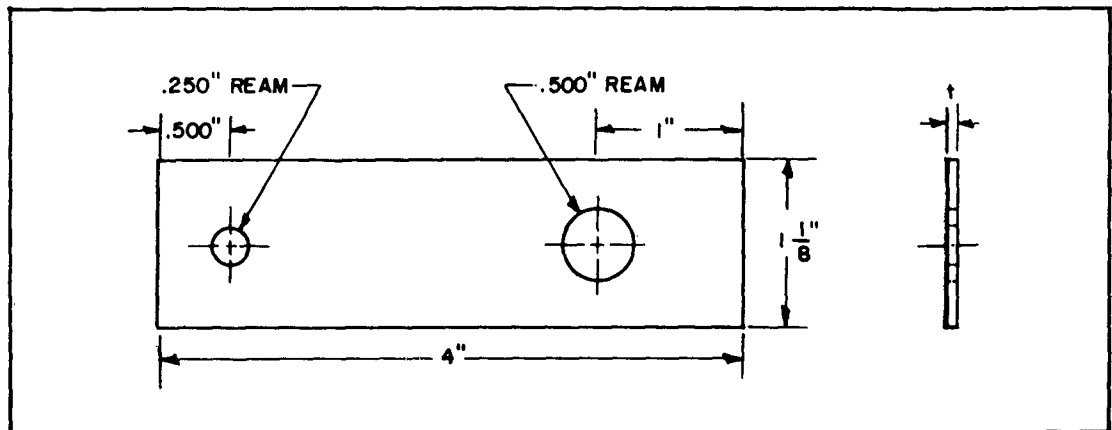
Sheet Bearing Test, Specimen-Bearing Ratio $e/D = 2.0$
